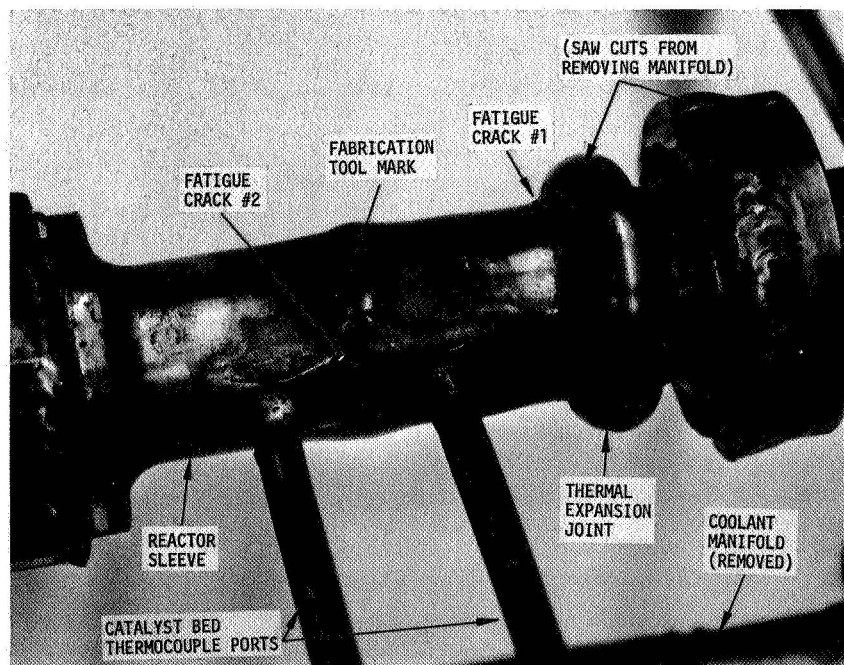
Cooled Reactor Hardware with Expansion Joint - Sectioned to Show Fatigue Cracks
